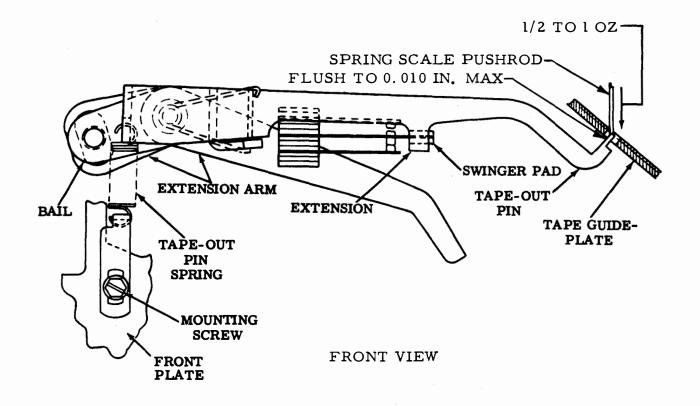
Tape-Out Pin Spring and Tape-Out Pin
